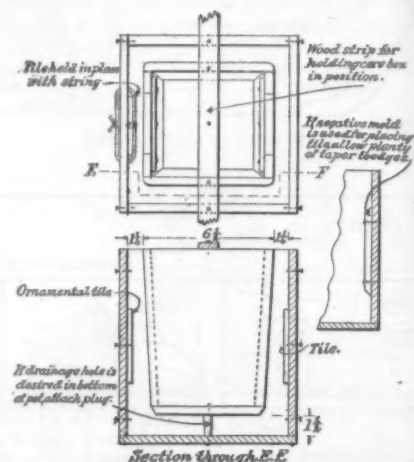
THE MOLD ASSEMBLY FOR THE PLACING OF THE CONCRETE.
